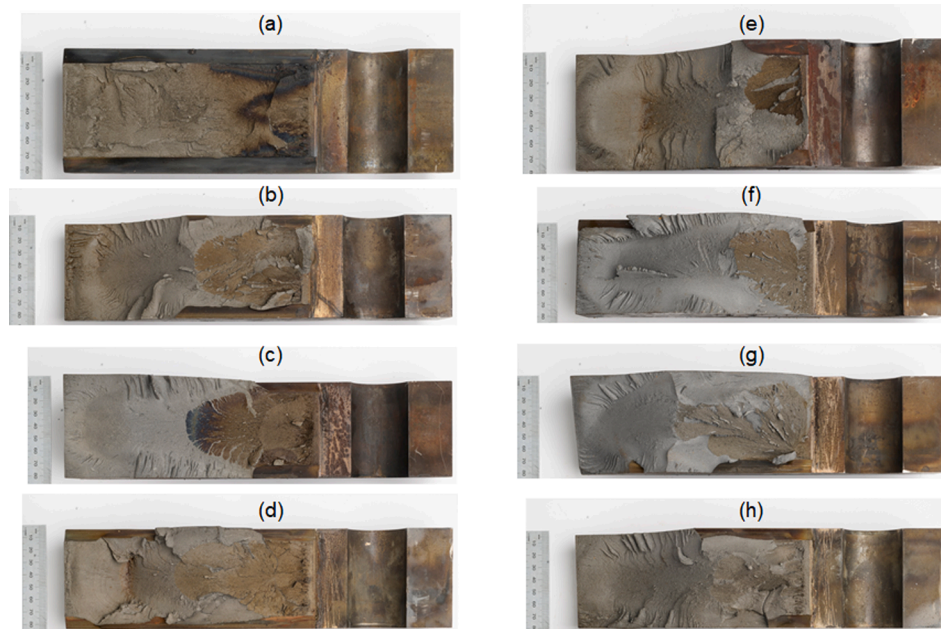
Fracture surface of (a) CCA1, (b) CCA2, (c) CCA3, (d) CCA4, (e), CCA5 (f), CCA6 (g), CCA7, (h) CCA8 specimens.
